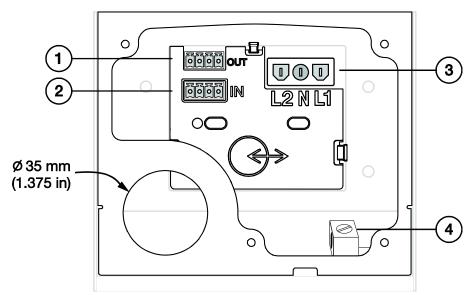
Powerwall 2 AC Wiring Compartment Inlet and Connectors
